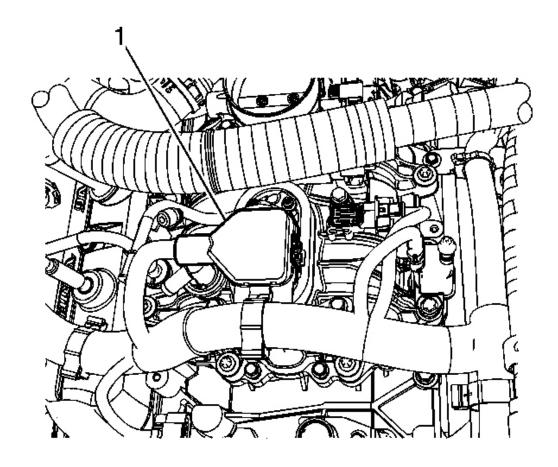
Control Port Injector Module Courtesy of GENERAL MOTORS CORP.
